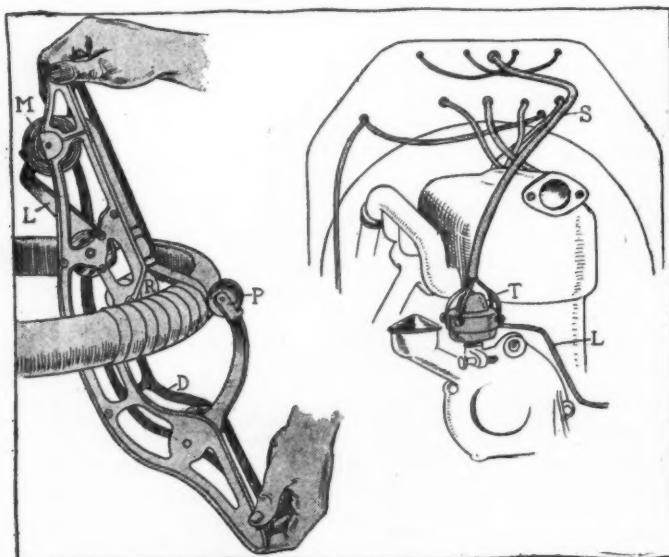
Rossman tire-wrapping machine. Fig. 2—Device for elevating the timer of Ford automobiles
